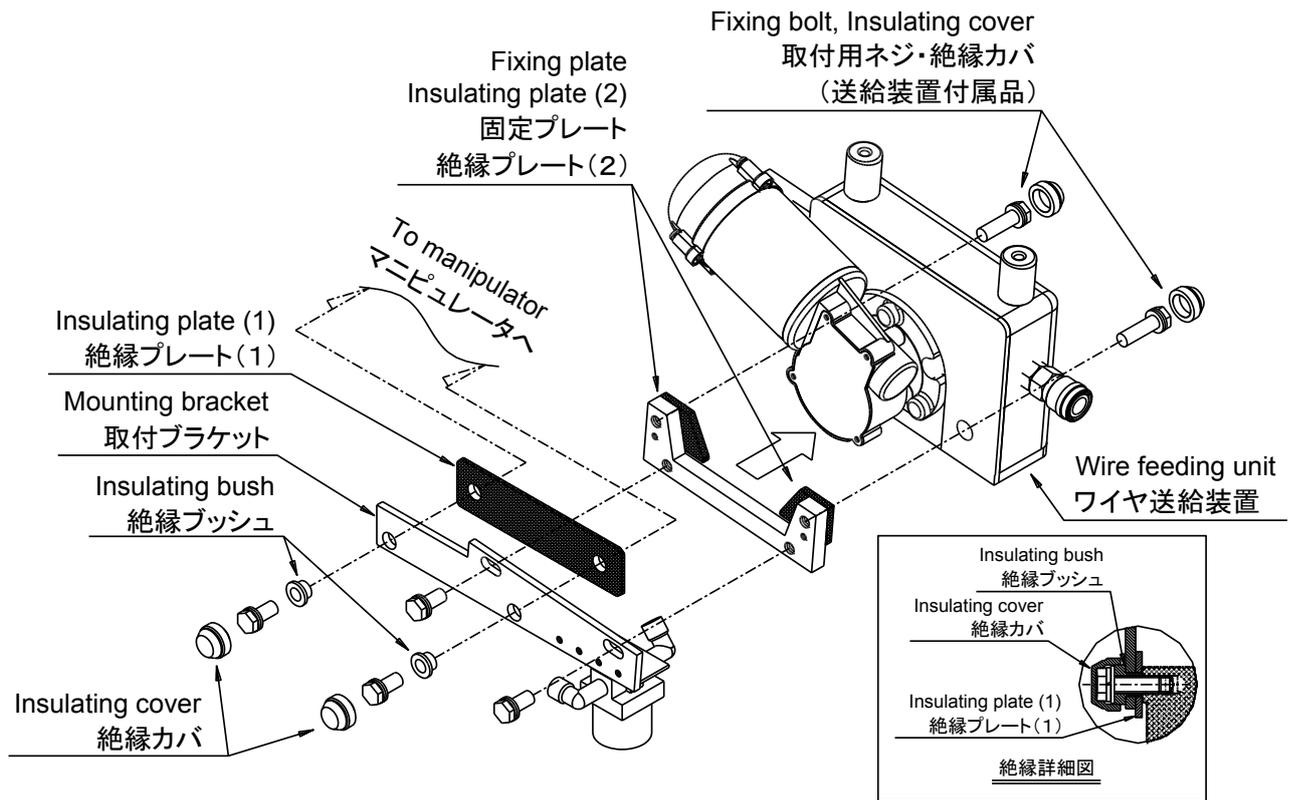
Mounting of manipulator fixing bracket and wire feeding unit (Procedure (2) and (3))
